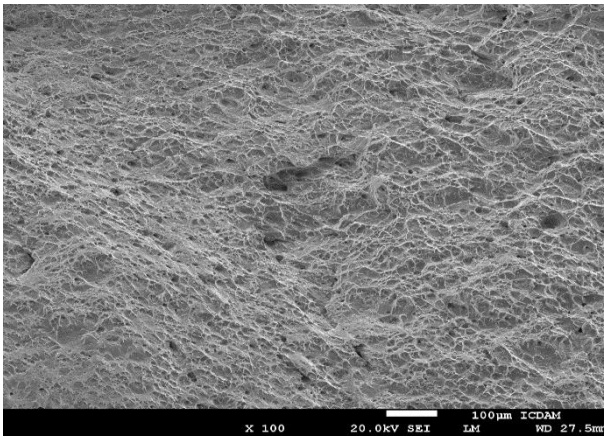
Ductile fracture surface of as-received HR3C steel [54]
